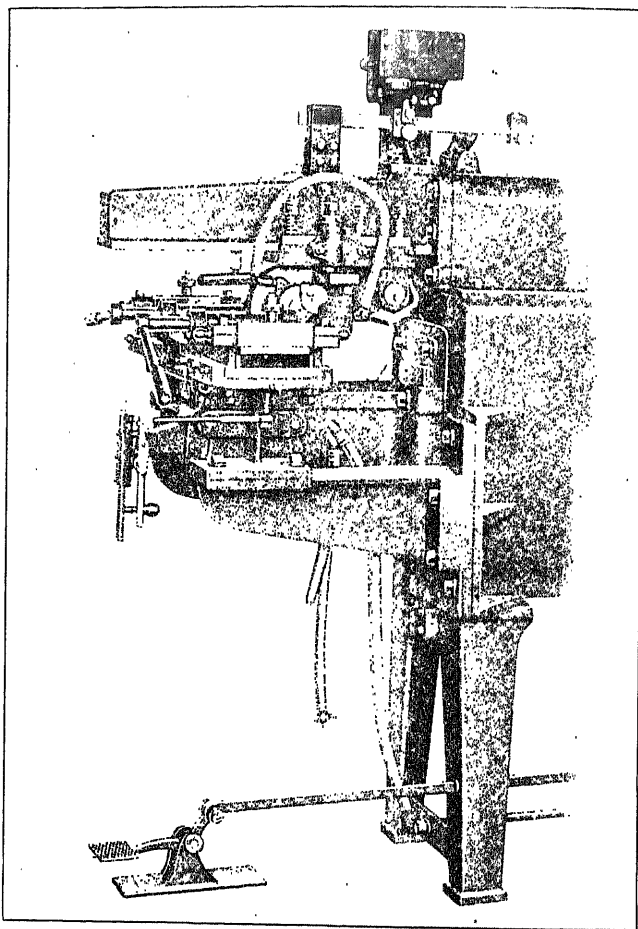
Jig for Welding Ends of Metal Strips Together.
